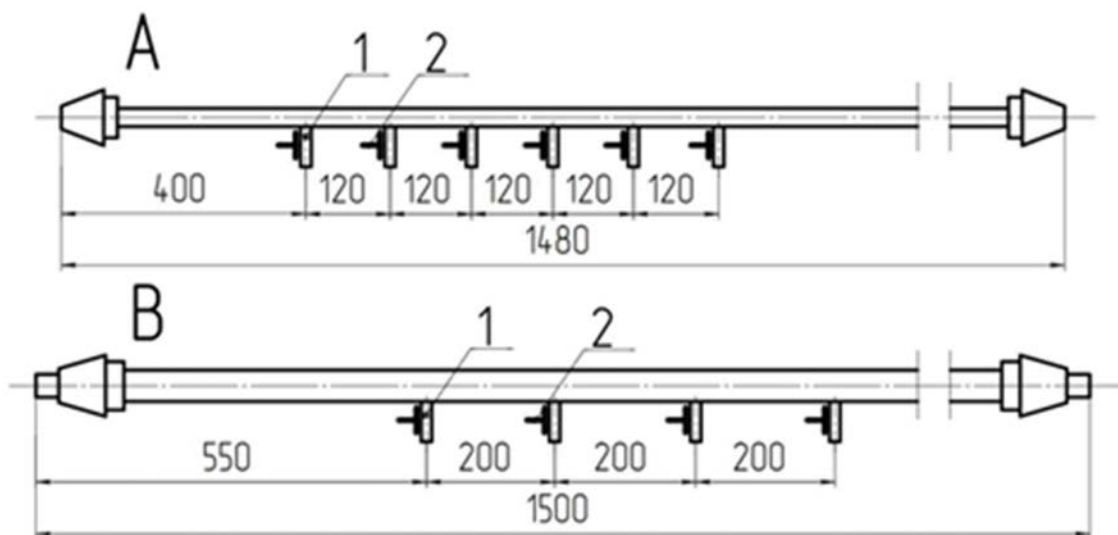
Tube test sections A (ID = 6.28 mm) and B (ID = 9.50 mm).
